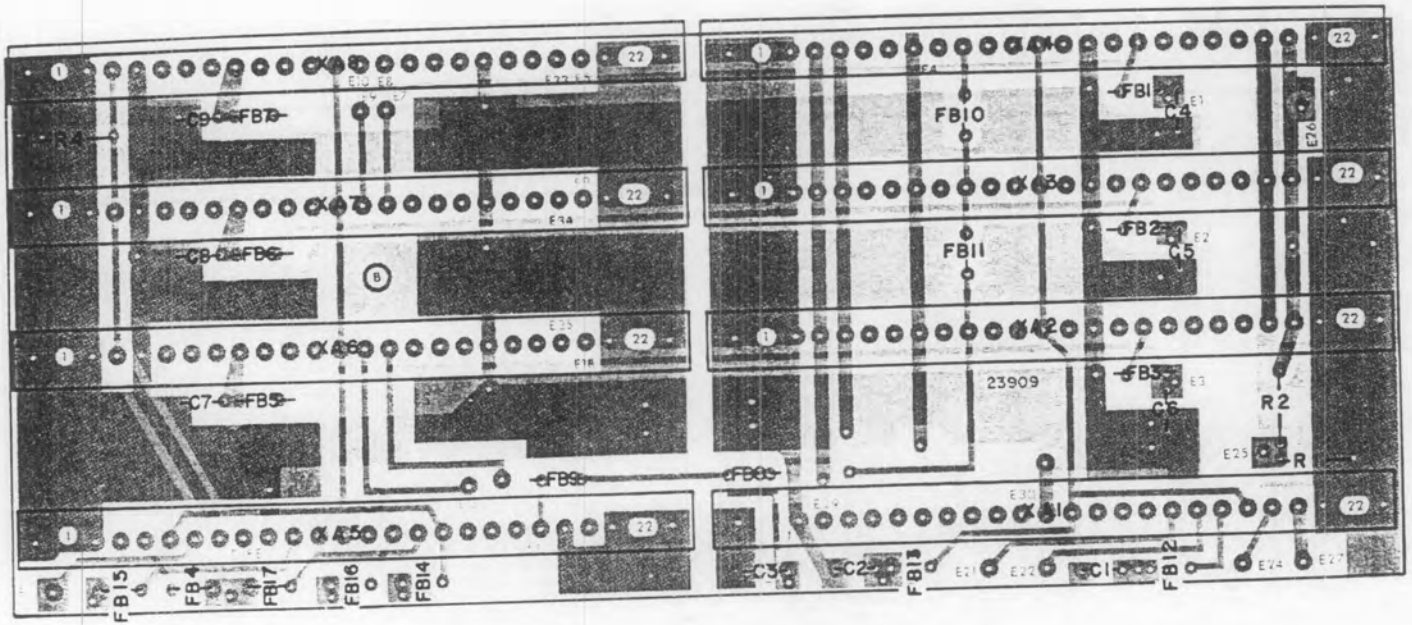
Type 23909-2 IF Mother Board (A6A9),
